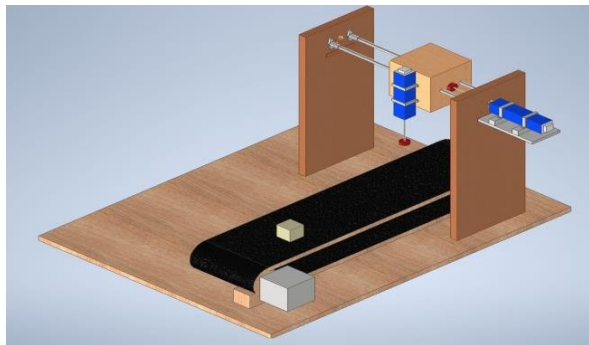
CAD model of pick and place arm for conveyor belt using PLC
